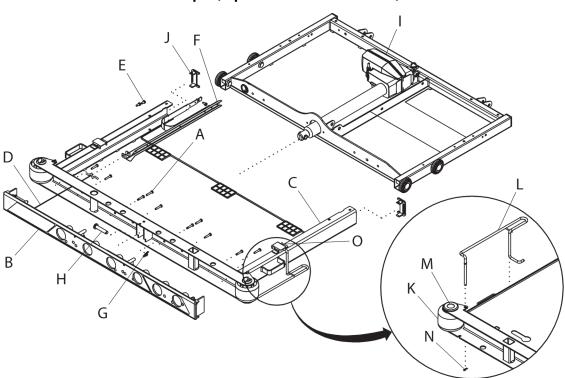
Sliding Foot Weldment (bottom view shown), Drainage Wireform Weldments and Bumper (top view shown in the detail)
